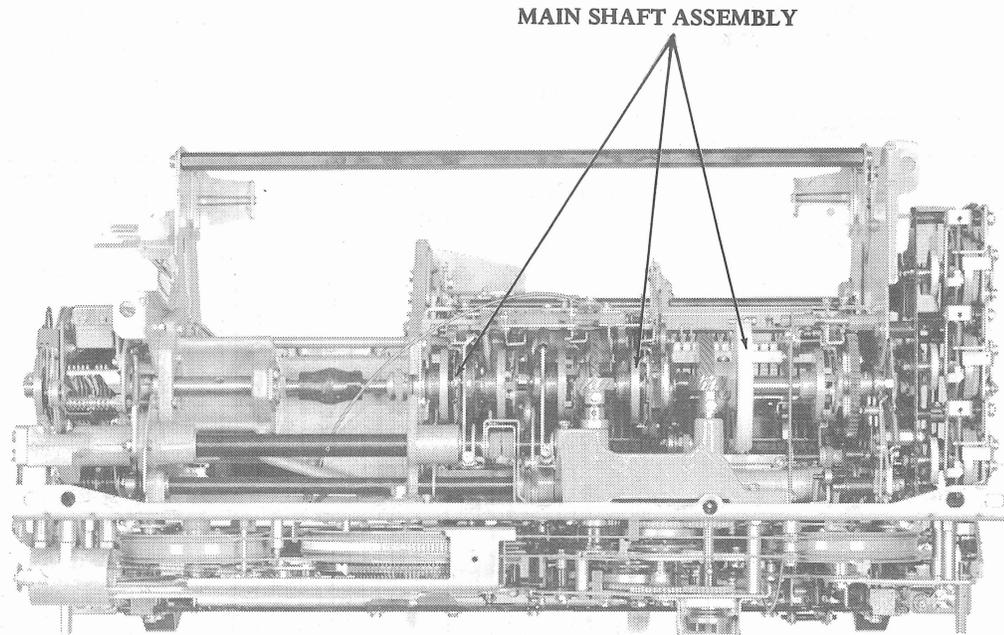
Main Shaft Assembly – Wide Platen Unit
